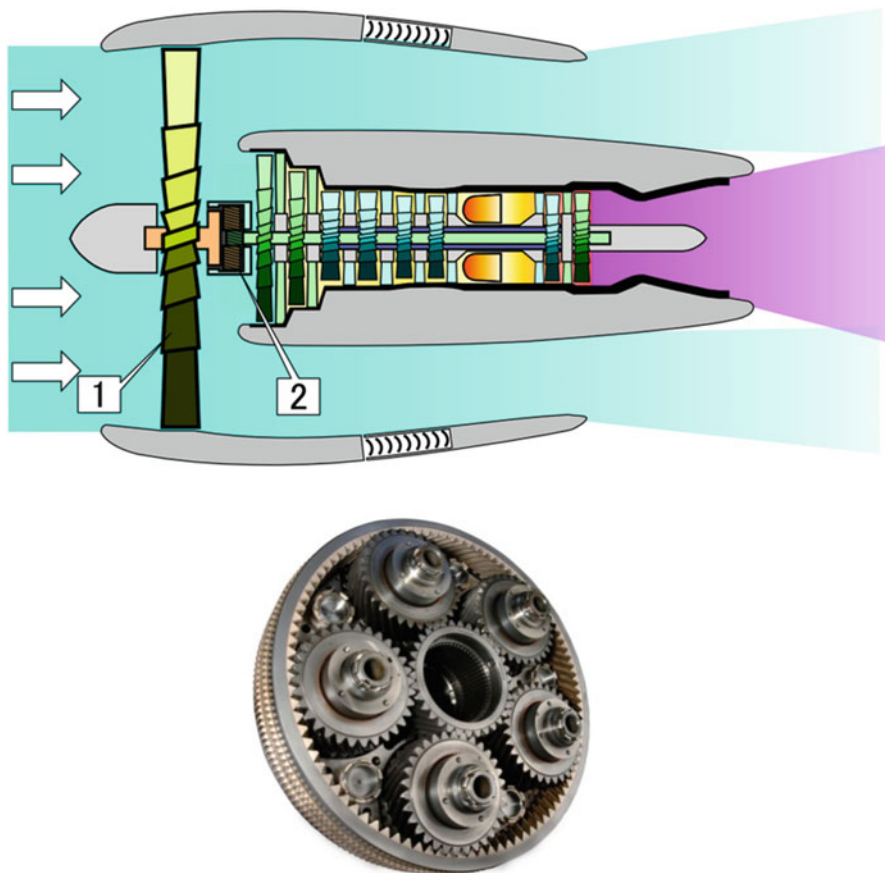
Layout of geared turbofan (*top*) and planetary gearbox (*bottom*). (1) Fan (2) planetary gearbox
